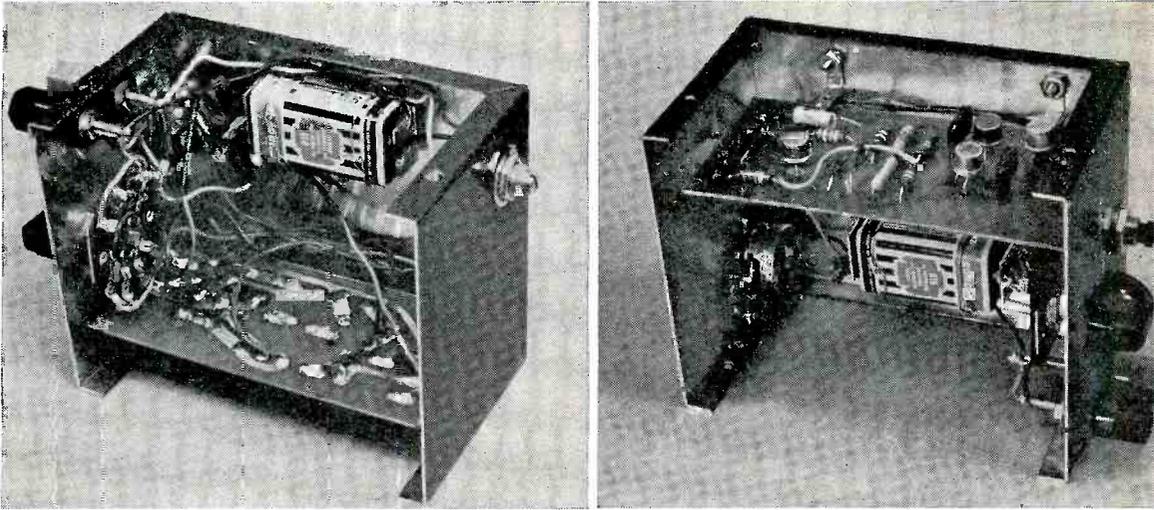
The bottom cover has been removed to show how printed circuit board is mounted in the cabinet. In view at left, the unit is on its left side. In view at right, the unit is turned on its right side.
